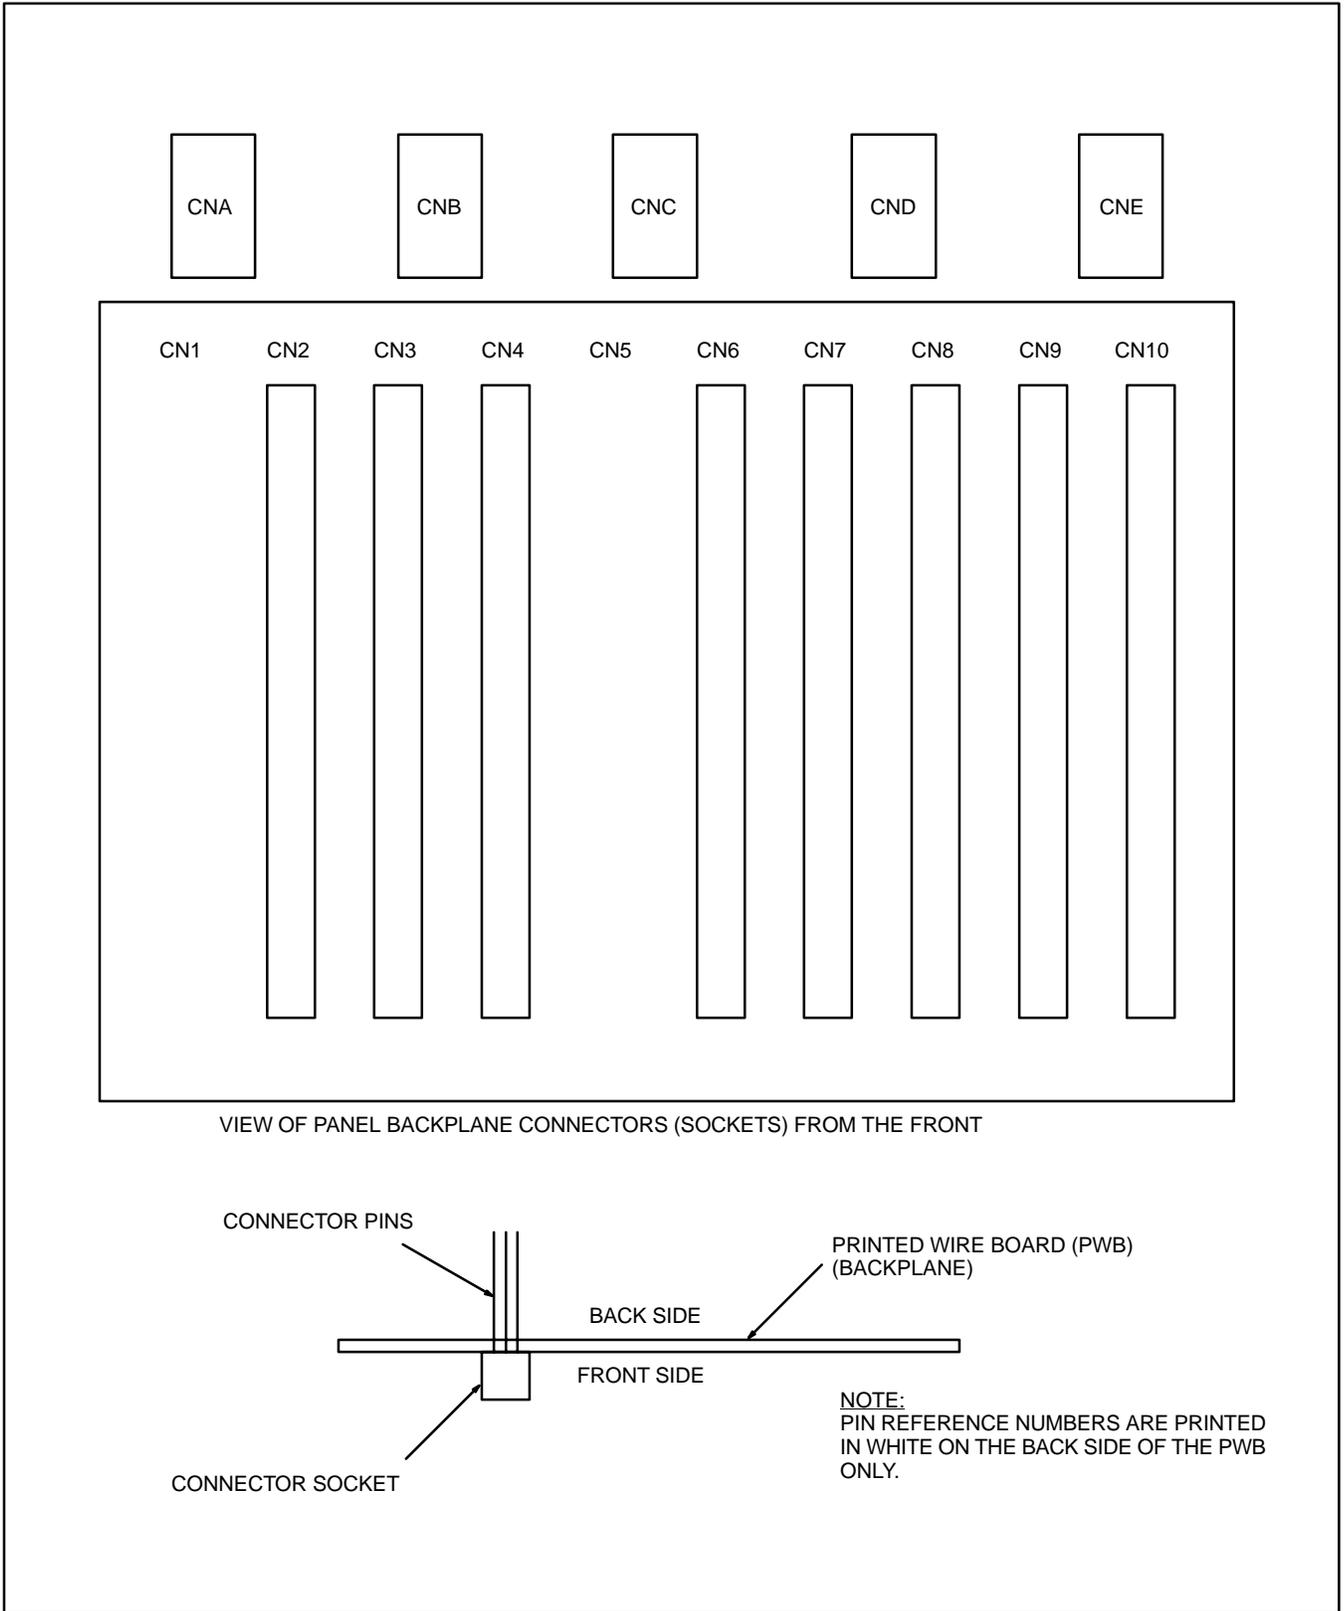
17FL328 PANEL BACKPLANE DRAWING. E-41687.
